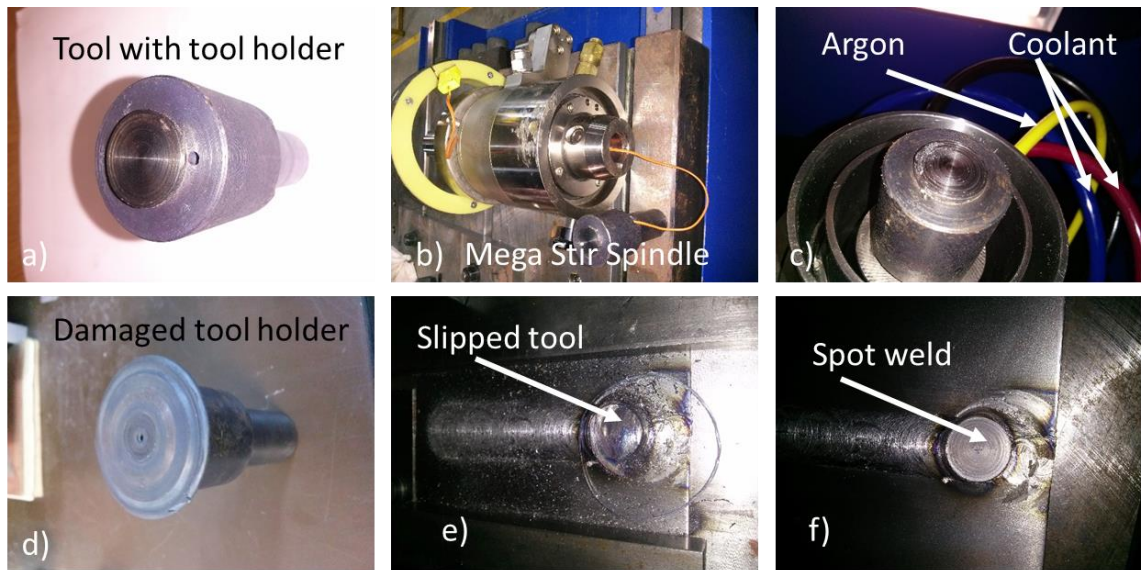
a) press-fit tool b) assembly c) Fitted tool d) holder e) slipping f) FSSW.
